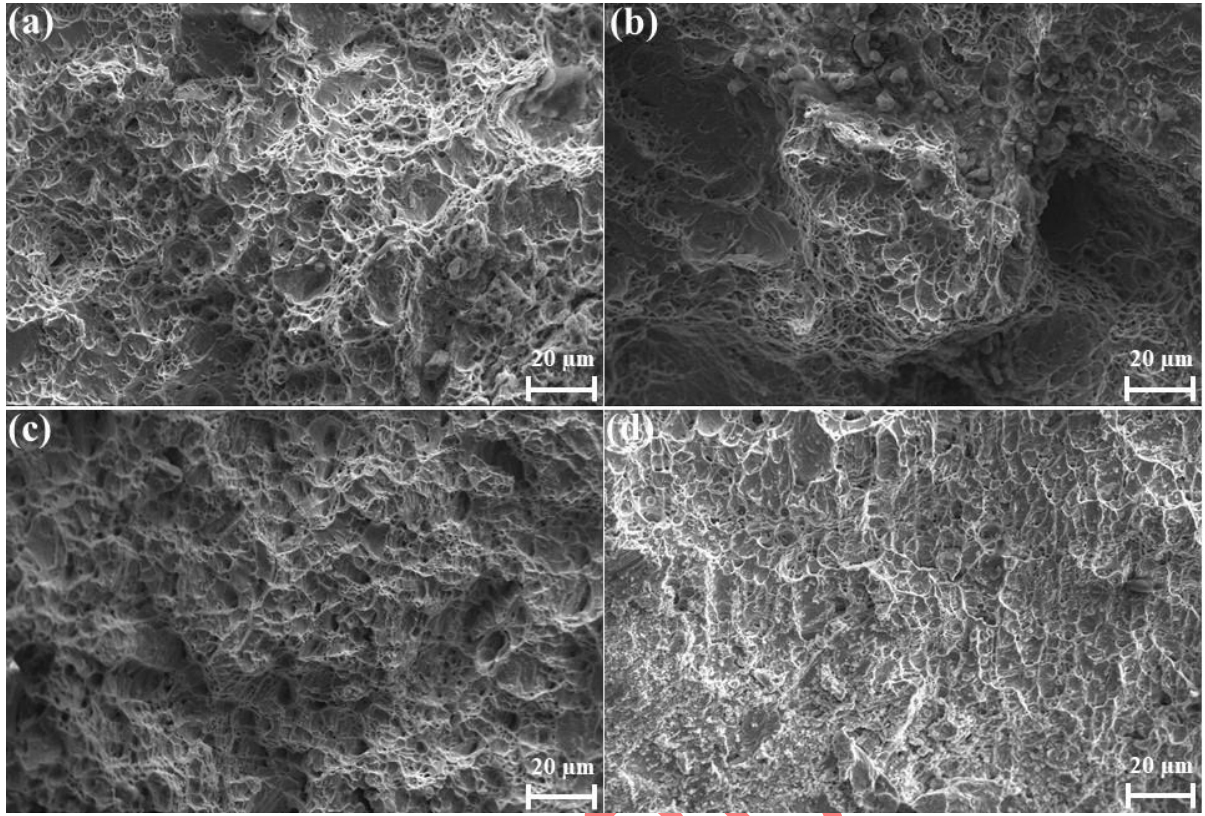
Macro view of fracture after tensile testing of single-sided and double-sided welded specimens at 260A welding current (260A kaynak akımında tek taraflı ve çift taraflı kaynaklı numunelerin çekme testinden sonra kırılmanın makro görünümü)
